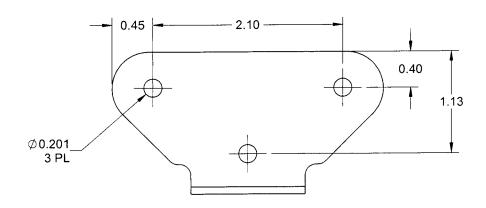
LOCATION OF D4330-3 DOOR BRACKET MOUNTING HOLES (OEM COMPOSITE DOOR AND DART SPACEDOOR™)
